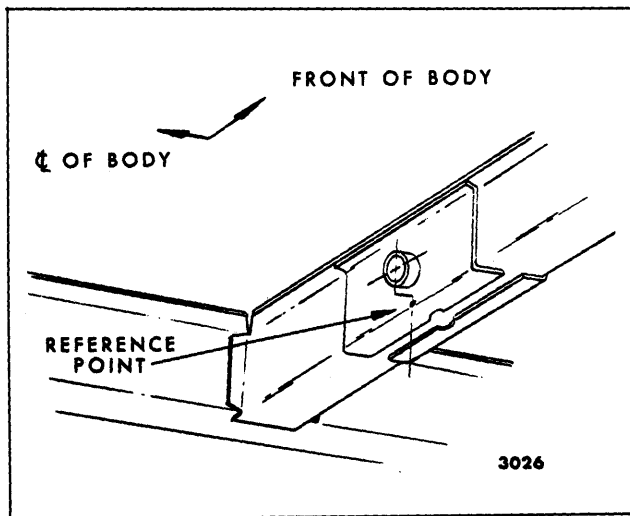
Side Rail at Rear Spring Rear Shackle Bushing
